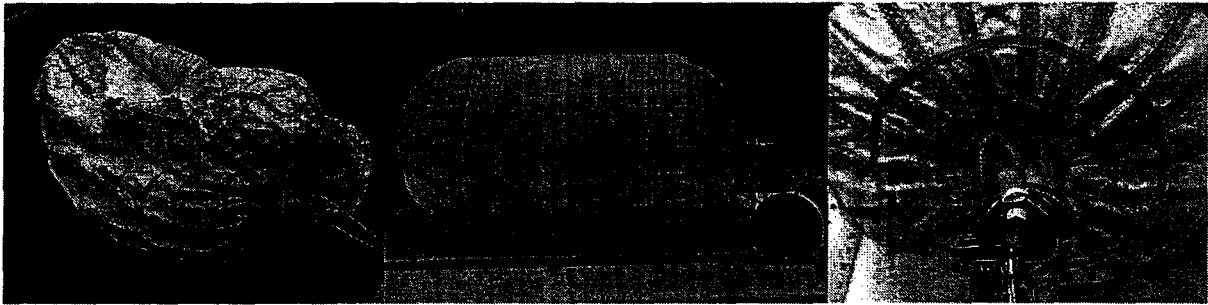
Complete reinforcement wall showing (from left to right): a) reinforcement with no inflation, b) under light inflation, c) detail of reinforcement around inlet fitting
